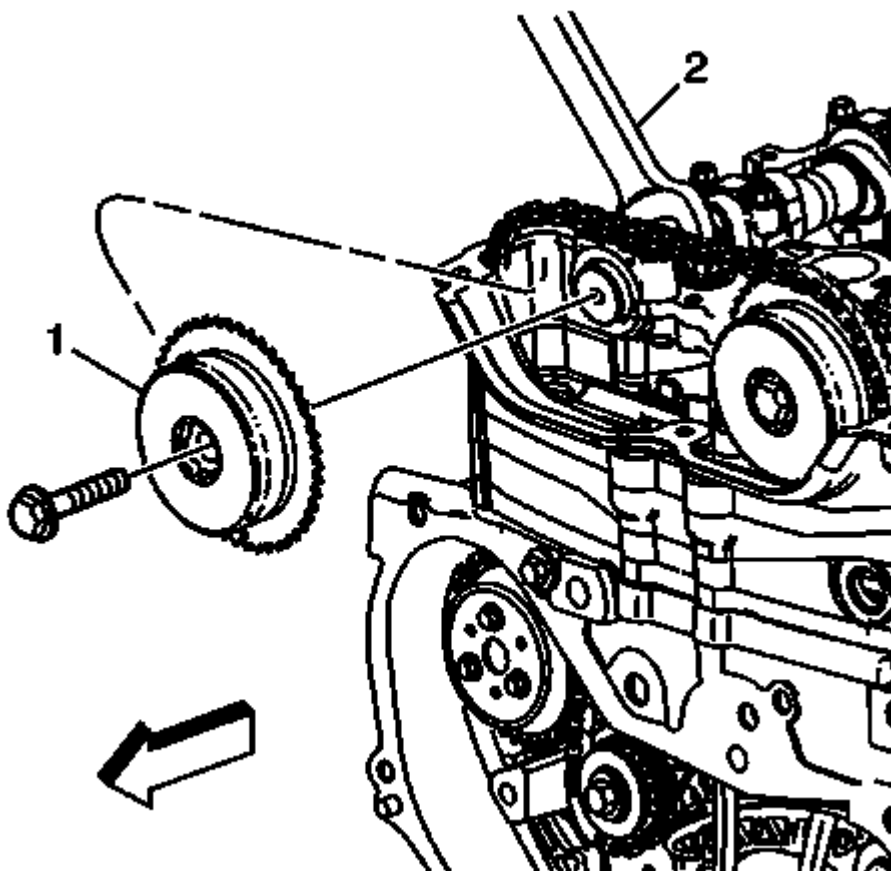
View of Exhaust Camshaft Bolt and Actuator
